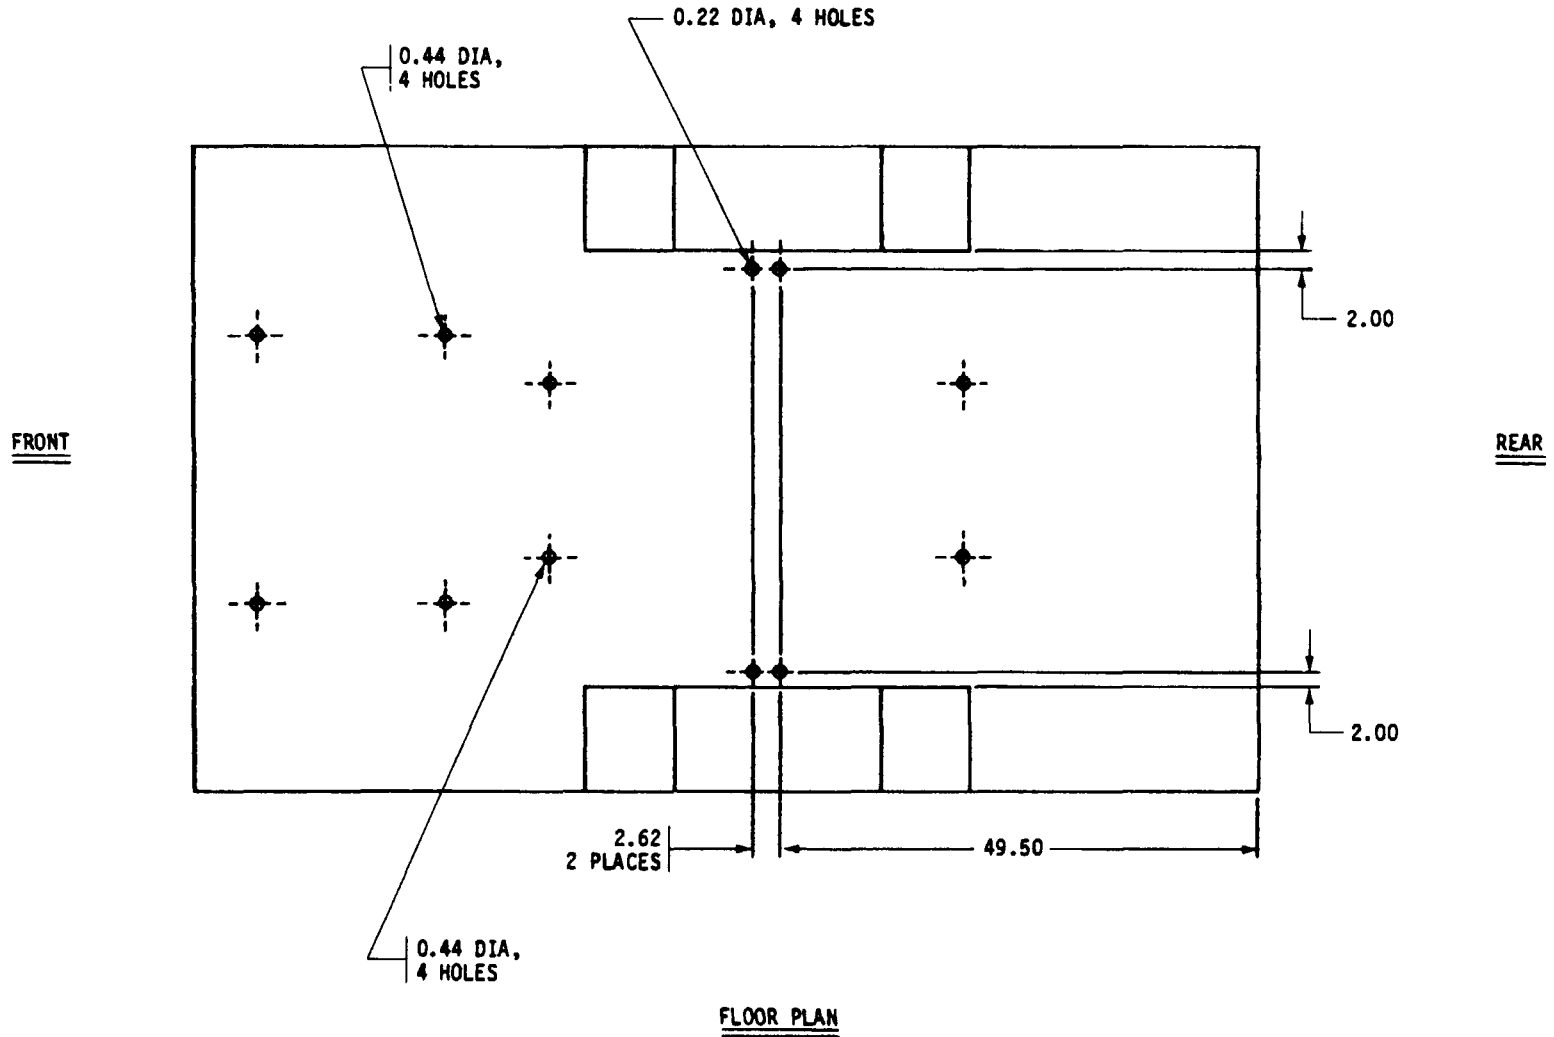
Hole Dimensions for Mounting Holes and Strap Loops, Unit 6, M105A2, Floor Plan.
